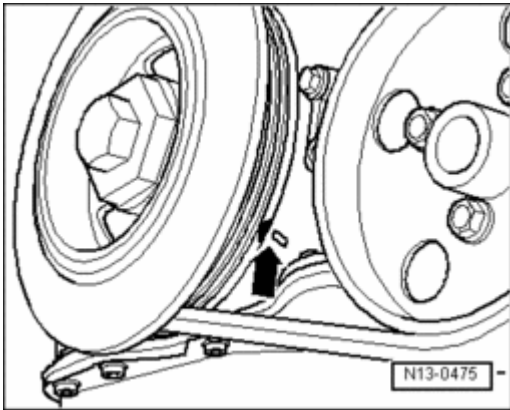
Identifying Crankshaft At Vibration Damper Securing Bolt In Engine At TDC Cyl. 1
